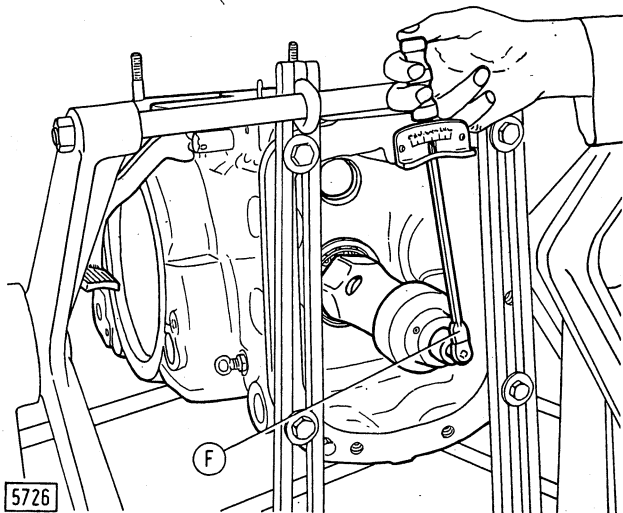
Tightening the nut (C_3 , Fig. III/10) with the torque wrench A 711041/2 (F) to check the bevel pinion bearing setting.
